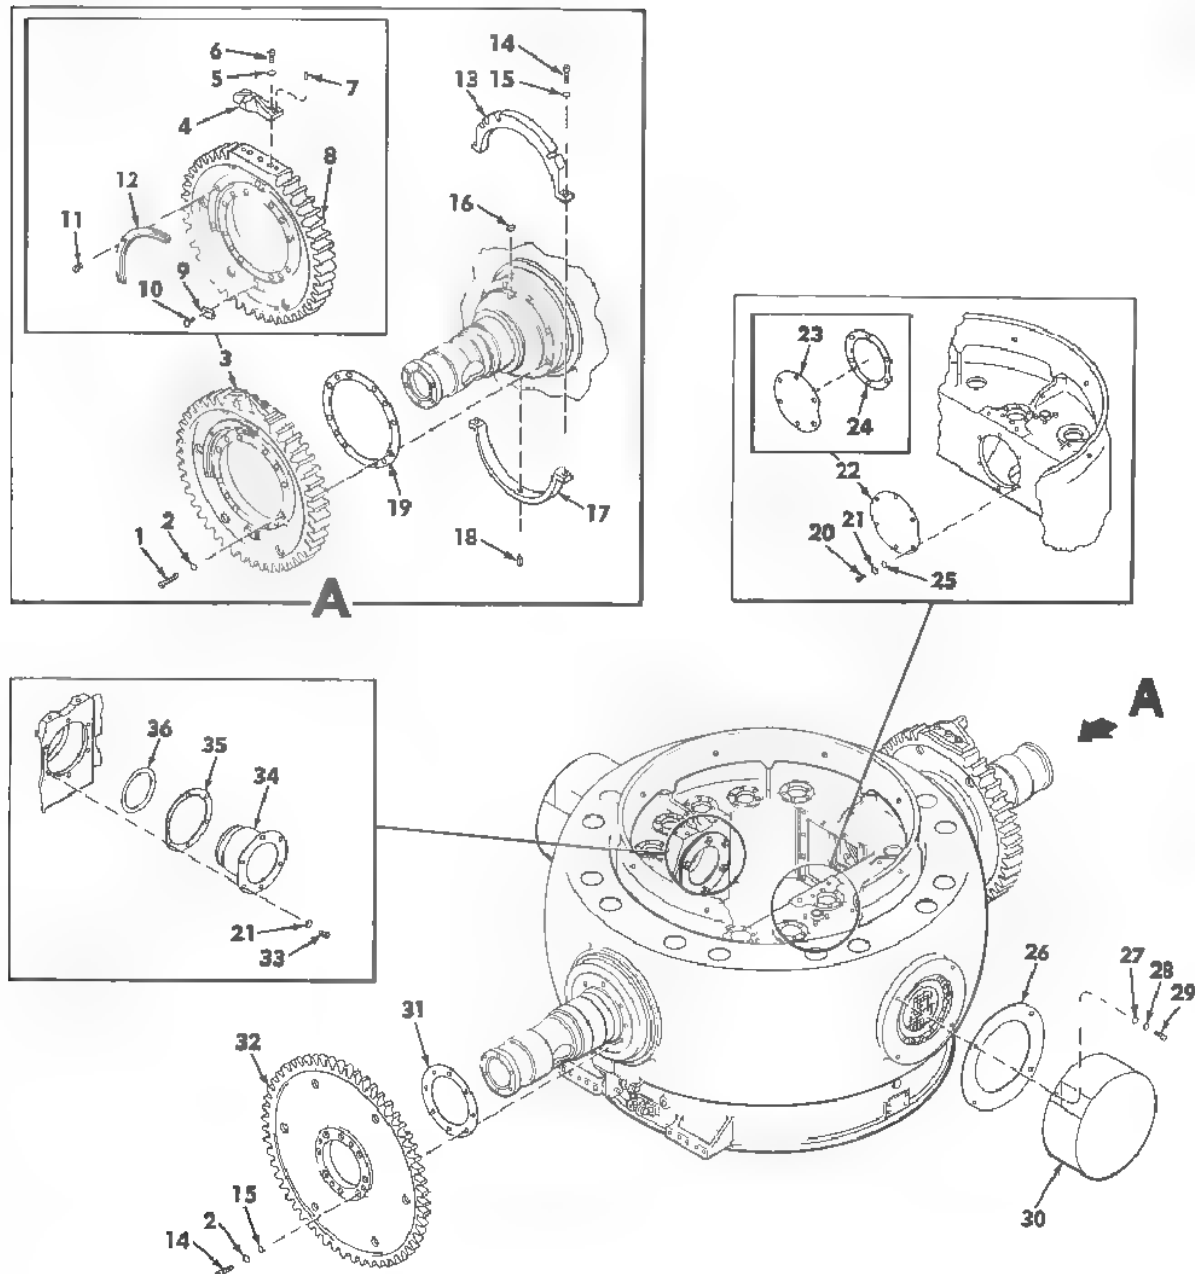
HOUSING 8171020-PARTIAL EXPLODED VIEW
